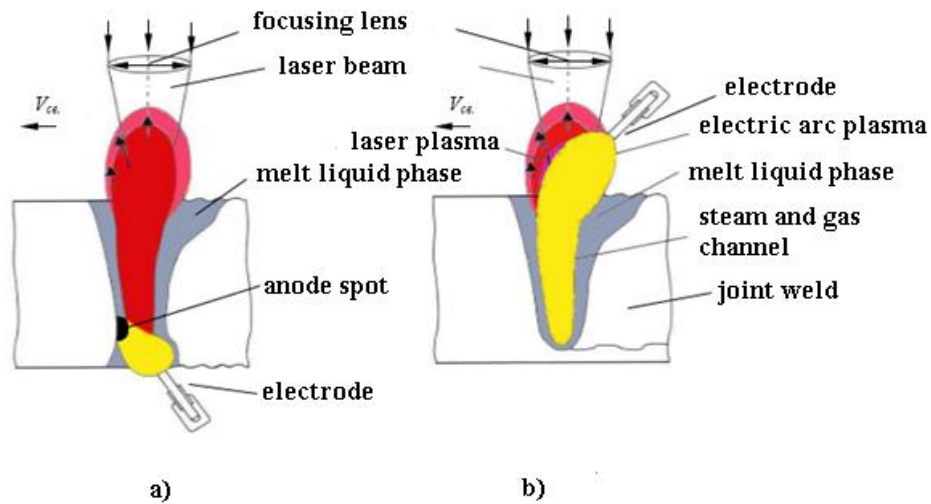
Geometric schemes of the implementation of the process of laser-arc welding [12].
